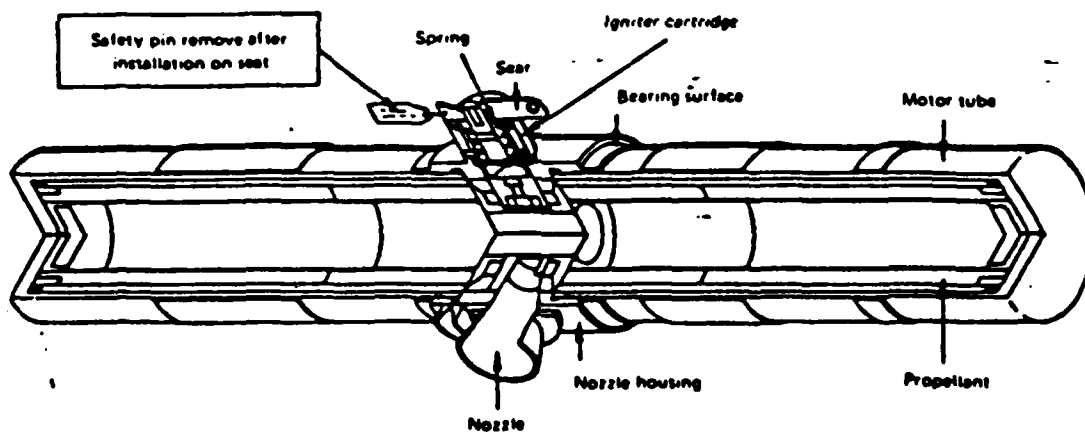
ROCKET MOTOR MK 84 MOD 0
